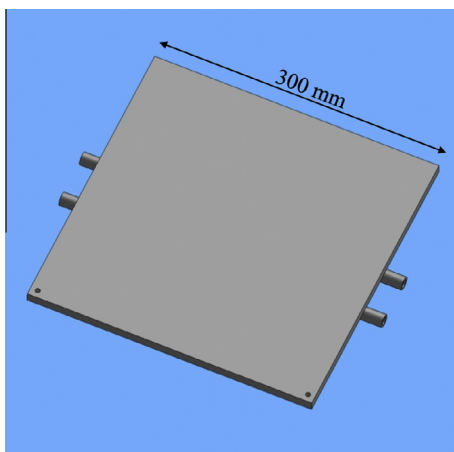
Schematic of Sample A, a plate of polished SS304L stainless steel with two stainless steel cooling tubes welded to one side. Sample B is identical to Sample A in geometry and composition, except that it is additionally coated with a thin layer of silver.
